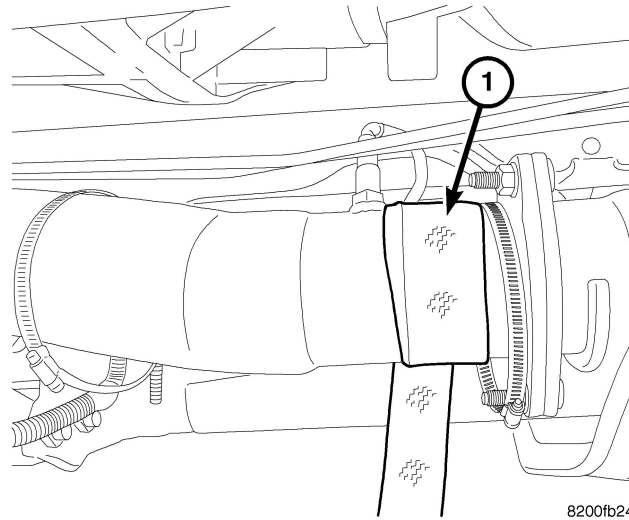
FIRST WRAP IN FRONT OF FLANGE
